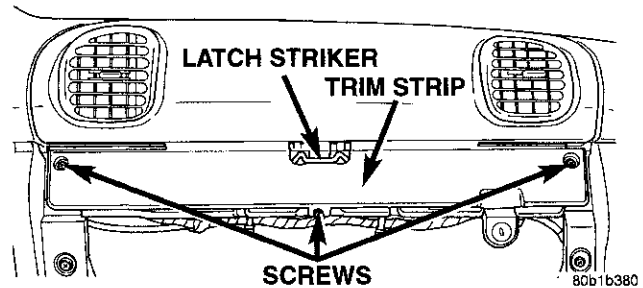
Glove Box Opening Upper Trim Strip Remove/Install
